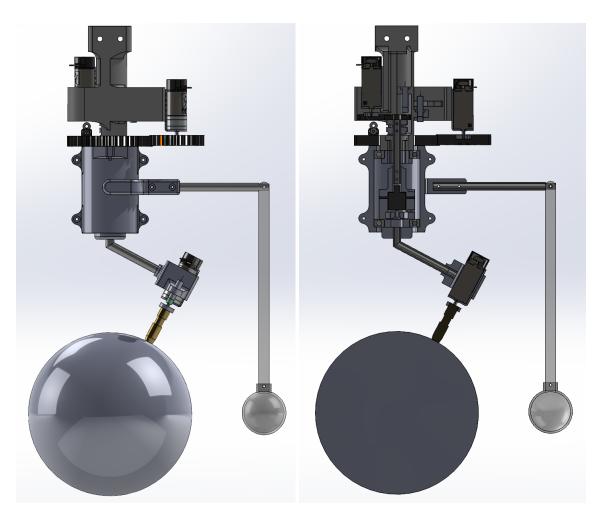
Side view of final Earth-Moon system assembly (left) and cross-section of final Earth-Moon system assembly (right).
